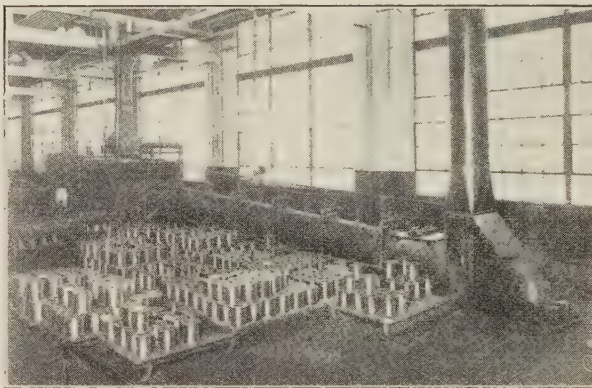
STEAM-SEAL ANNEALING FURNACE
